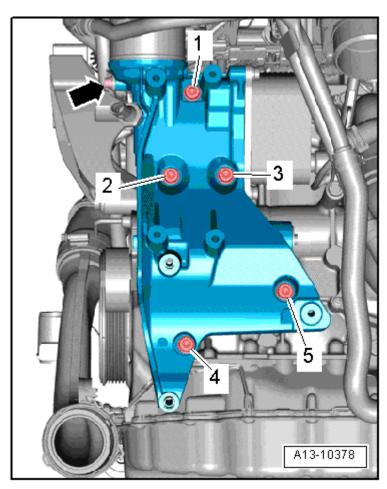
Accessory Assembly Bracket Tightening Sequence Courtesy of AUDI OF AMERICA, LLC
